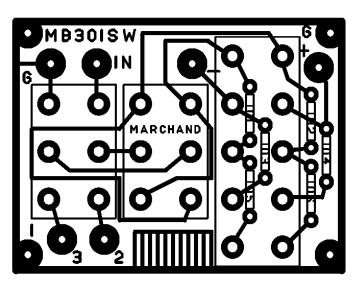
Circuit board layout of MB301SW shows location of resistors R101 ...R106. Resistors are mounted on <u>solder</u> side of the circuit board. The switches are mounted on the component side of the circuit board.
